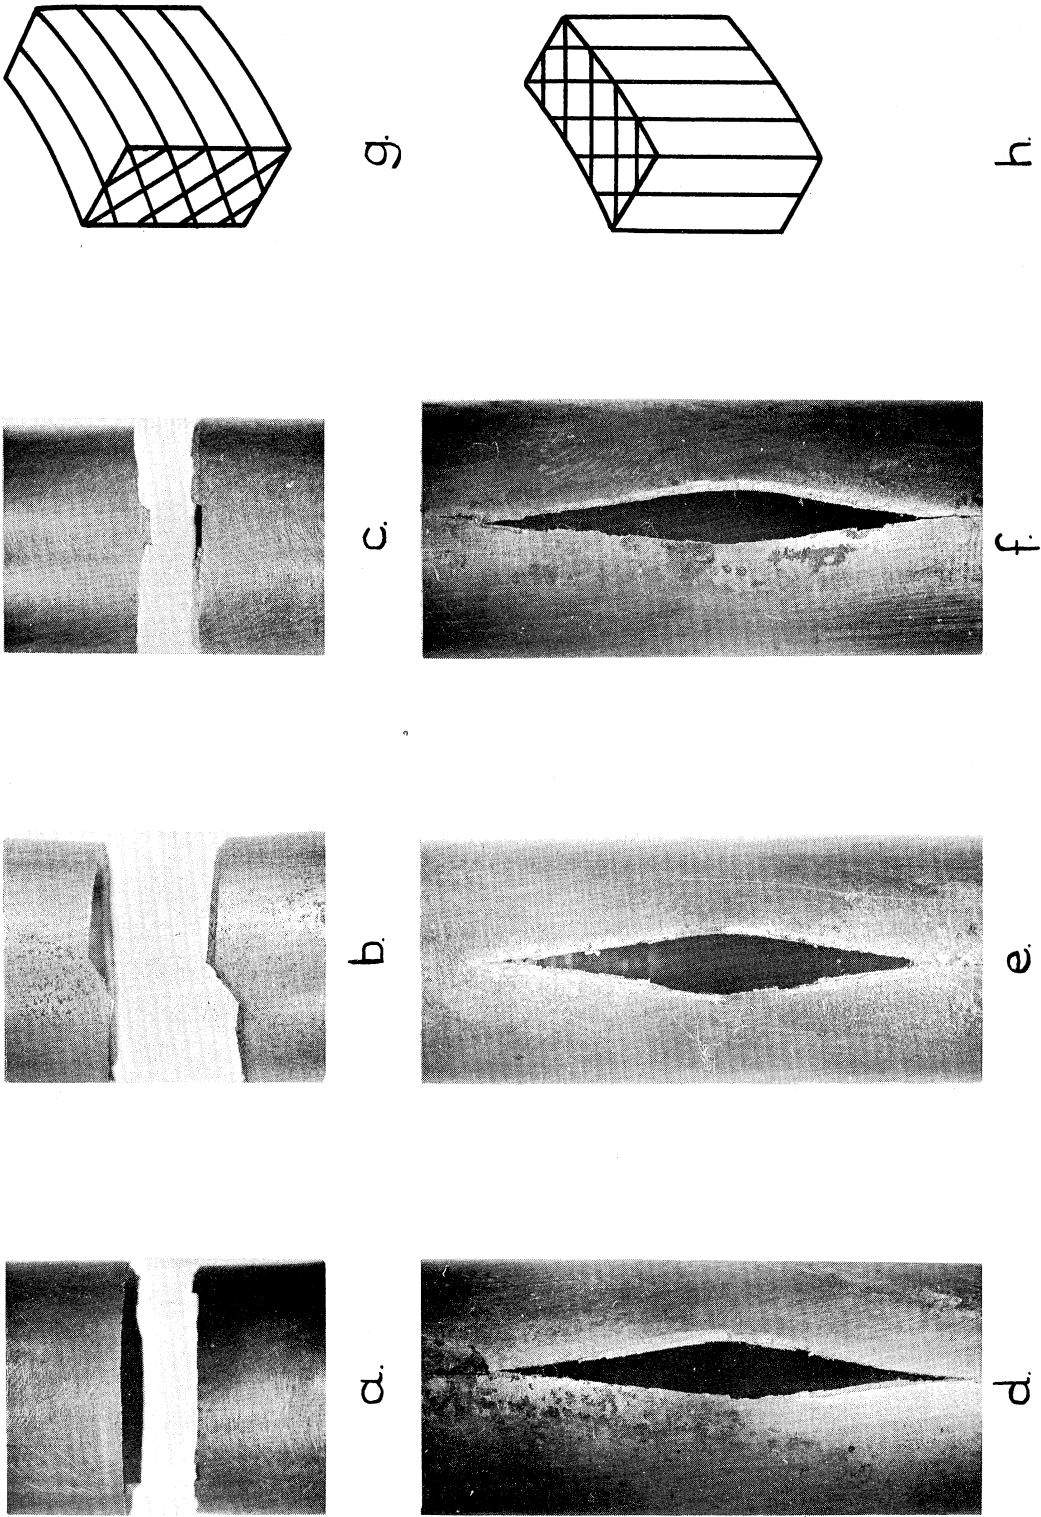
Appearance of tube fractures. The top photographs show specimens fractured with the traction ratio held at  $N/Q = 3$ , (a) throughout the loading, (b) after tensile prestrain and (c) after prestrain by internal pressure. The lower photographs (d), (e), (f) show the corresponding cases for the traction ratio  $N/Q = 1$ . Possible slip plane patterns for the upper and lower photographs are shown in (g) and (h) respectively.
